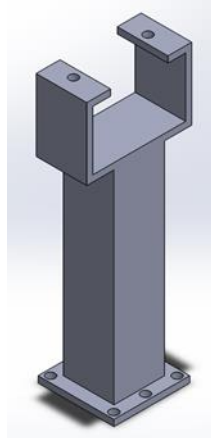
Solidworks model of the 5 inch x 5 inch 3D printed top for device holder for the Poly-chip system.
